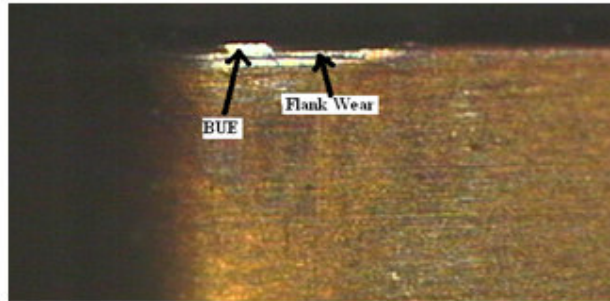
Tool flank wear with built up edge (BUE) in the CBN insert
